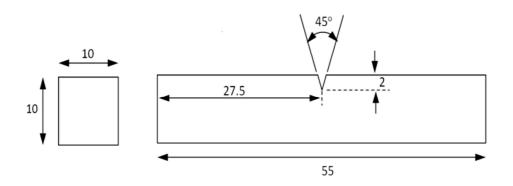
Dimension of Charpy impact test bar according to standard in (mm)
